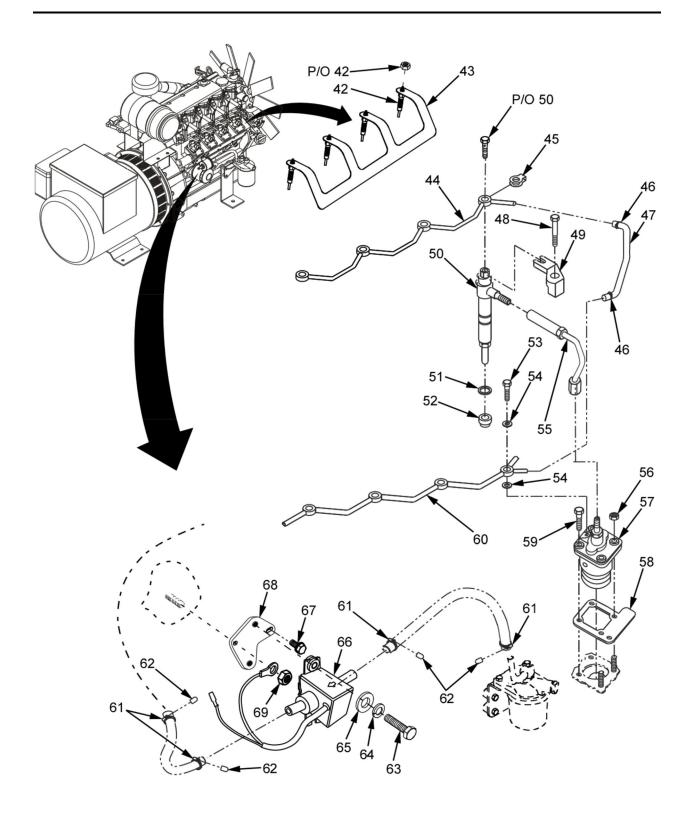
Engine-Generator Assembly 1013012 (Sheet 4 of 7).
